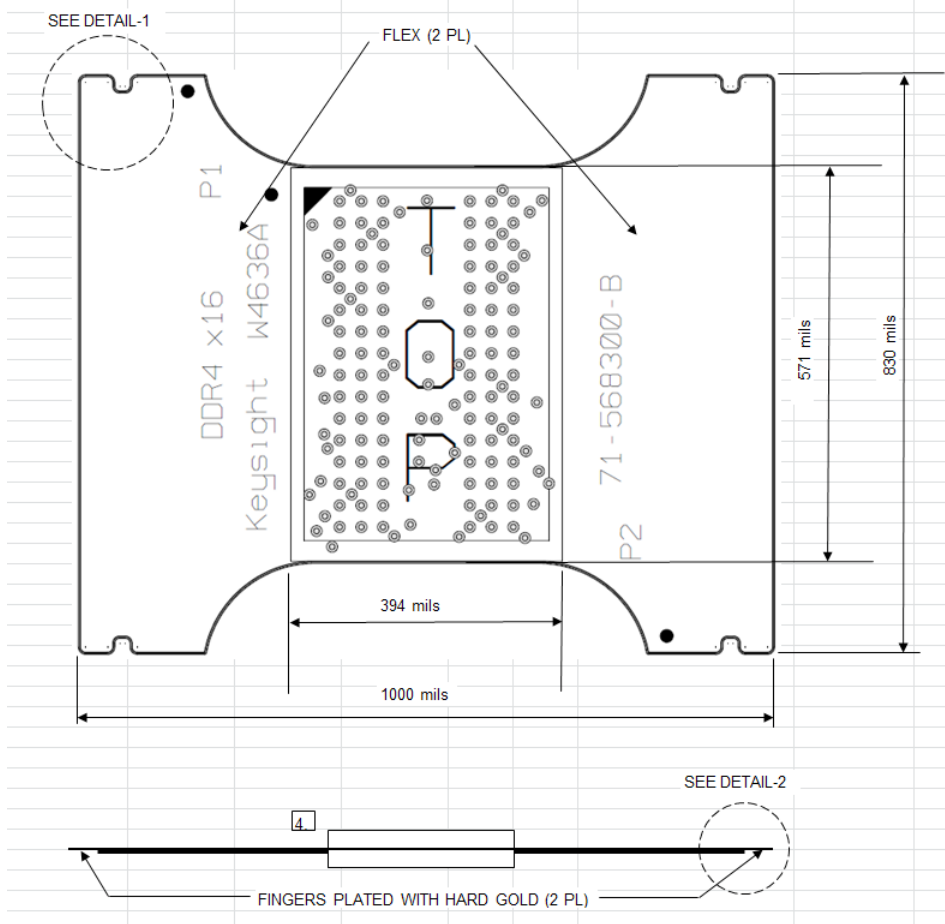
W4636A DDR4 x16 2-wing BGA interposer dimensions; Top view.
